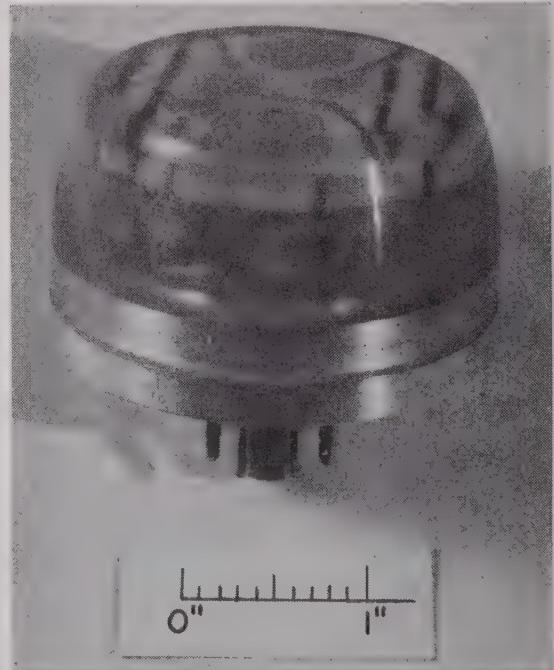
Printed plug-in unit encased in NBS Casting Resin.
